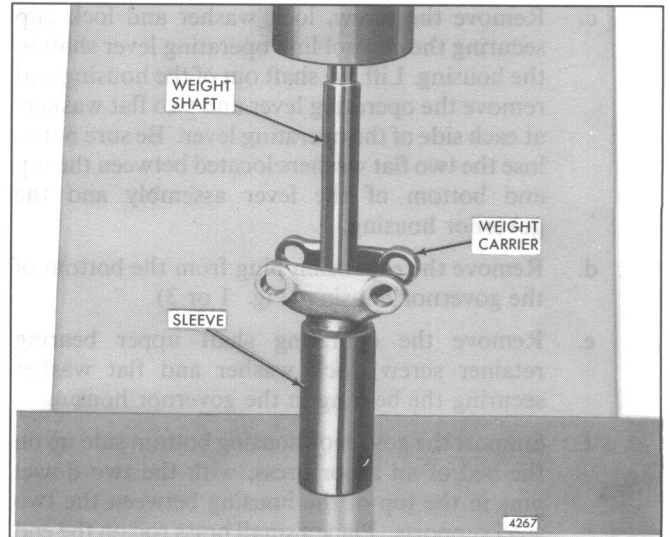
Removing Governor Weight Shaft from Weight Carrier
